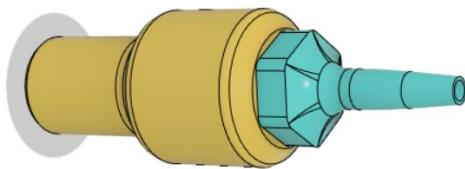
After screwing the Oxy Nozzle Body with the Oxy Nozzle Holder
